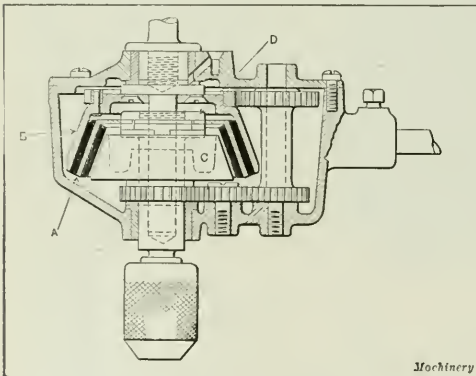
Cross-sectional View, showing Construction of the "Etco" Tapping Attachment
